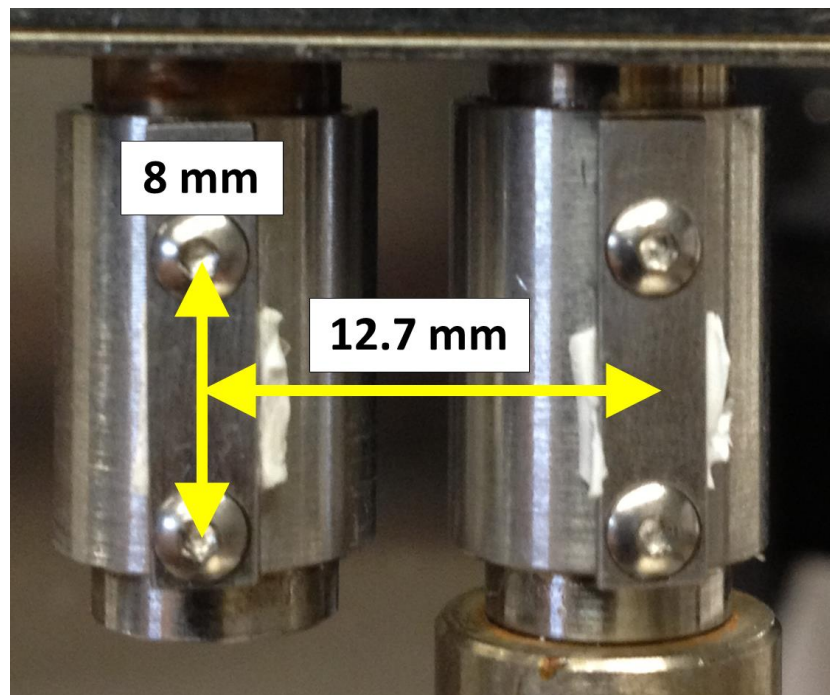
Modified SER fixture with screw down clamps and rubber pads
